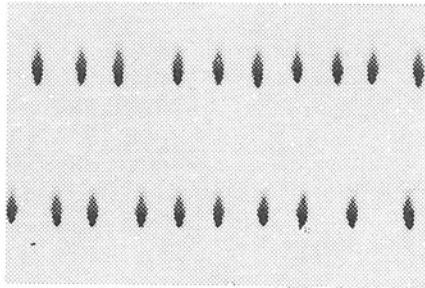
Holes drilled at 25 deg. using 0.005-in. waterjet
